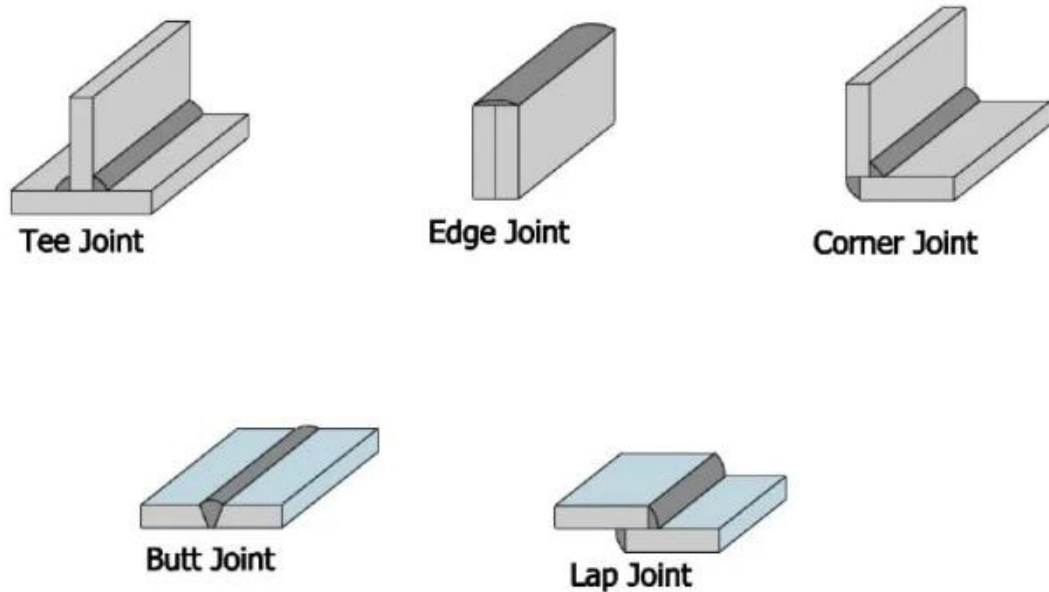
Basic joint types of weldments.[66]
